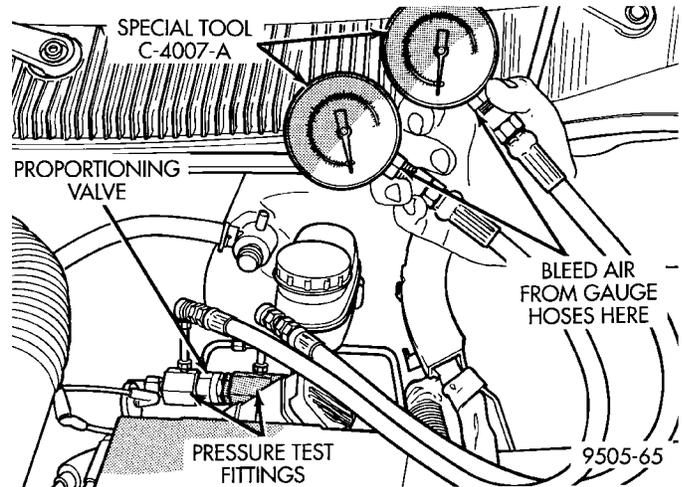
Pressure Gauges Installed On Pressure Test Fittings
